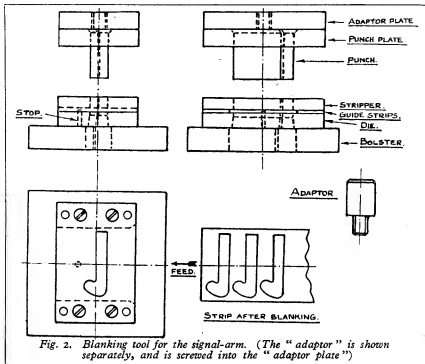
Blanking tool for the signal-arm. (The "adaptor" is shown separately, and is screwed into the "adaptor plate")
